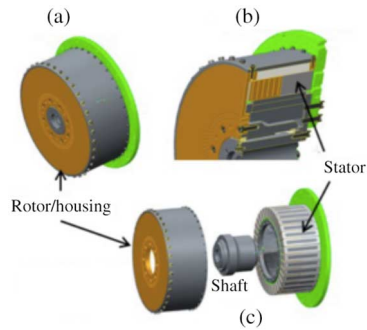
Direct drive PM machine for e-taxi for aircraft [67]. (a) Overview. (b) Cross section. (c) Exploded view.
